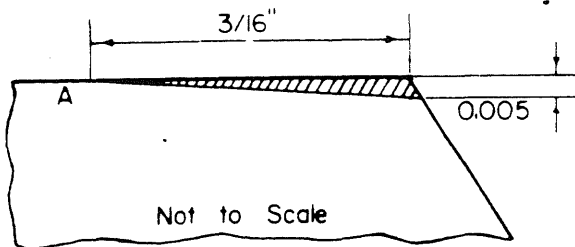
WELDING PROCEDURE PI30(T)-L140-A
